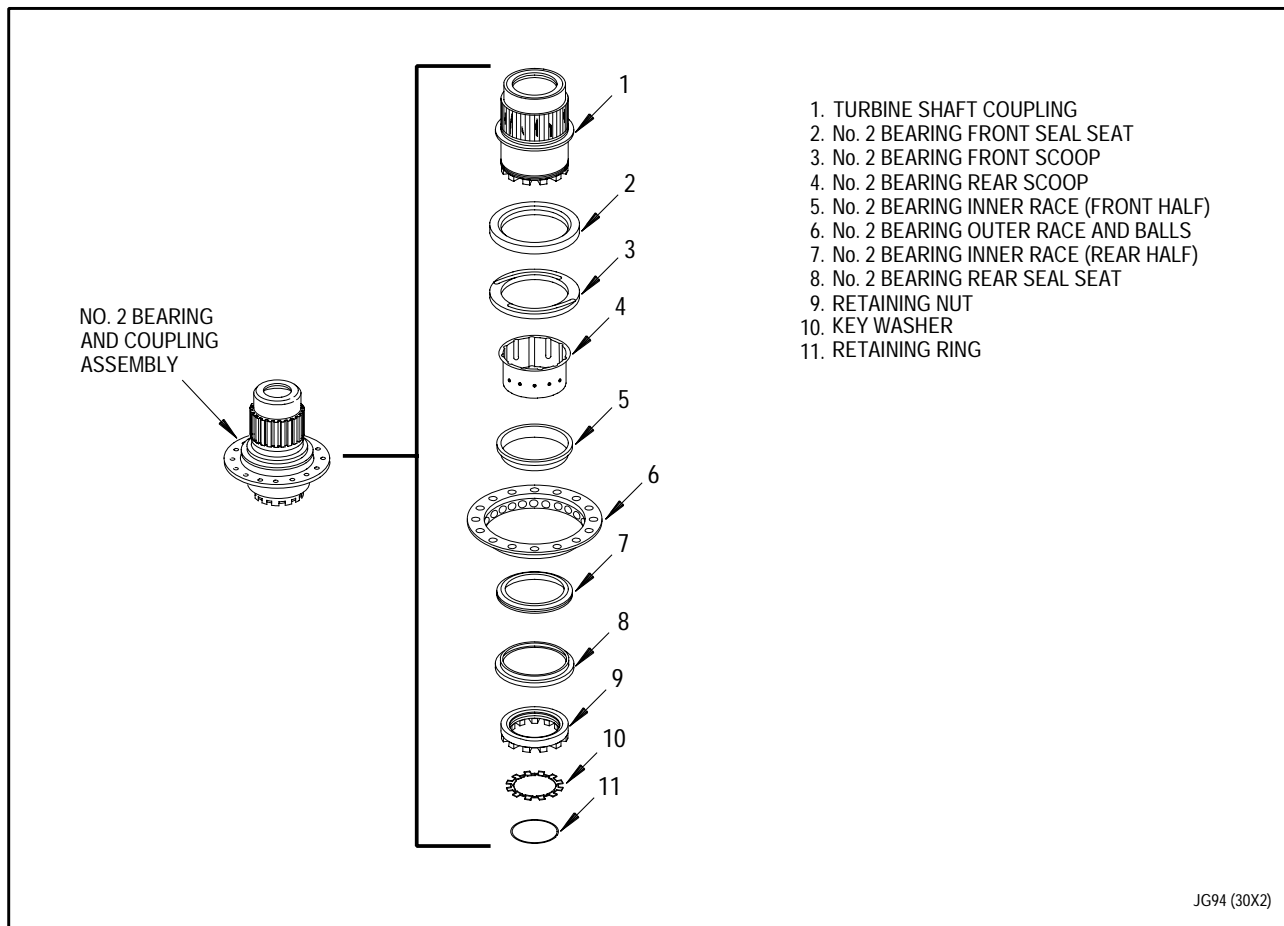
No. 2 Bearing and Coupling Assembly - Disassembly
